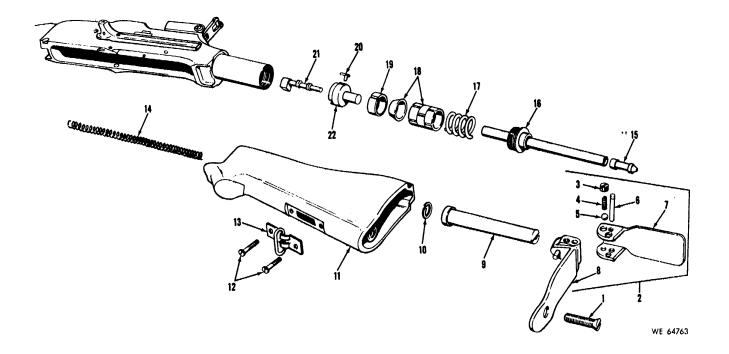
Butt stock, buffer and actuator group - exploded view.
